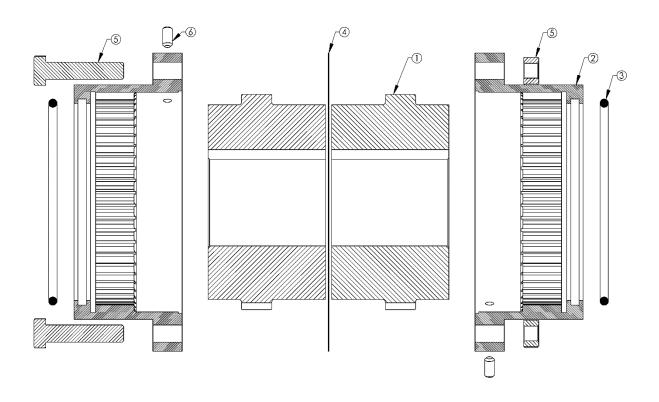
STEEL GEAR DOUBLE FLEX COUPLING (EXPLODED VIEW)
